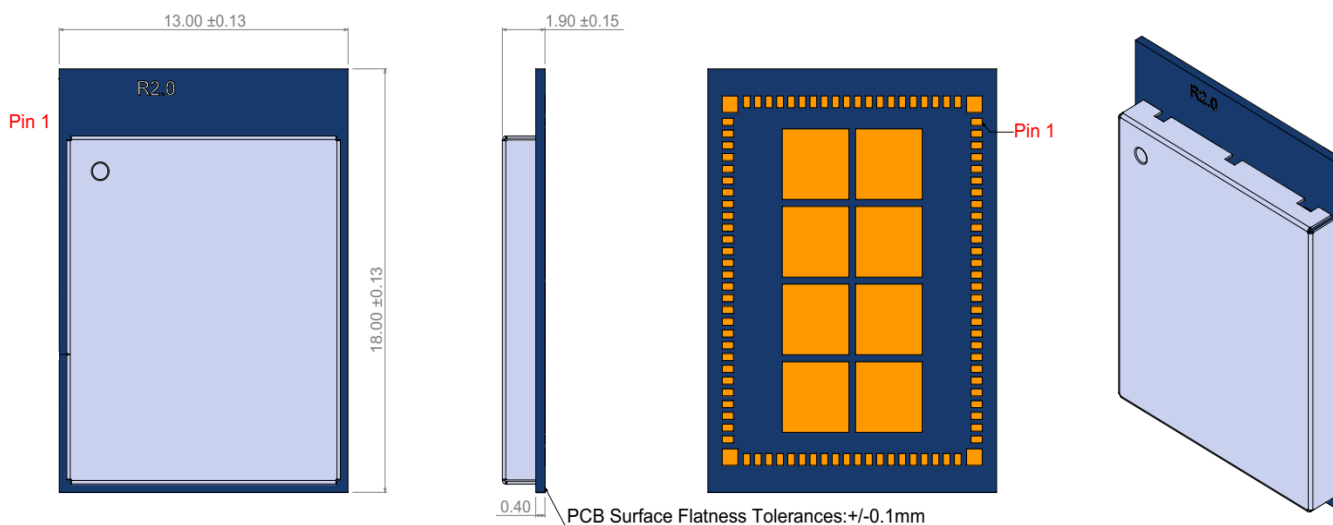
Mechanical Drawing - SMT module with External Antenna Connector (-ST)
